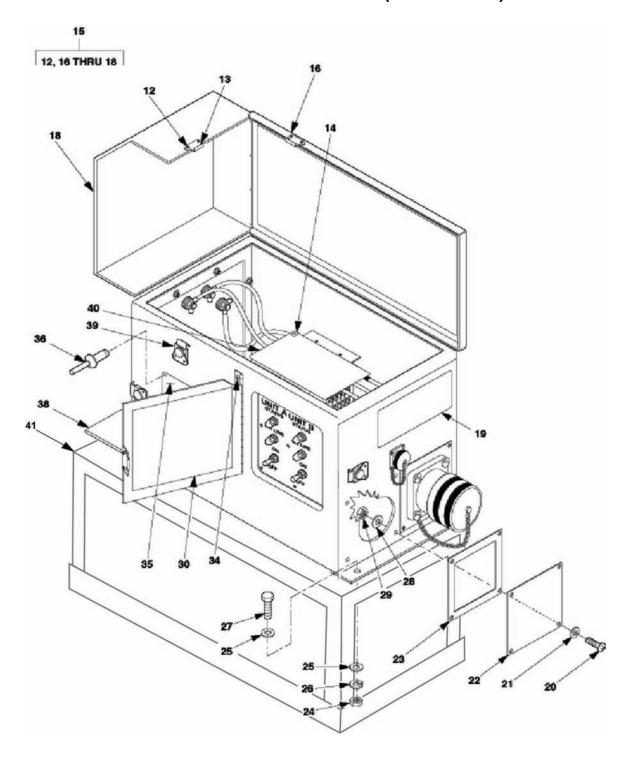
A. Switch Box Assembly, Sheet 2 of 2 (B&C Models).
